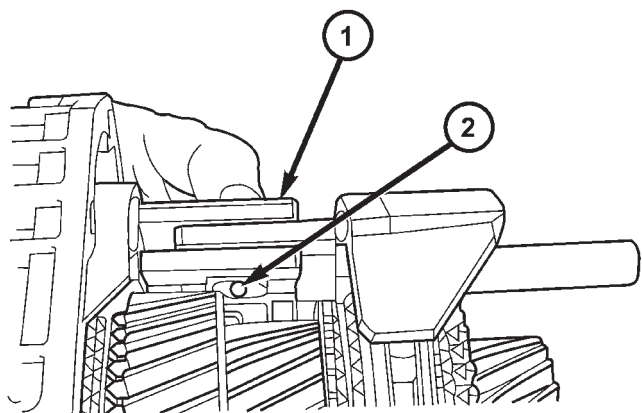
SEATING SHIFT SOCKET ROLL PIN
